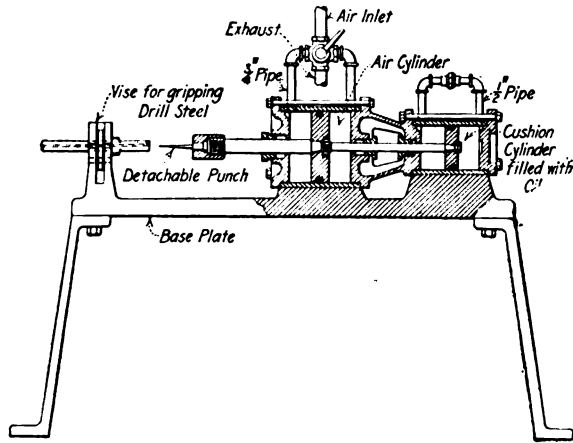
Punch for hollow Drill-steel Bits and Shanks
